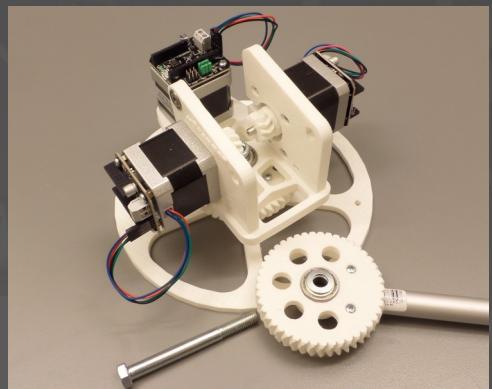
Both side plates with motors are now mounted. Prepare the main gear for assembly.
